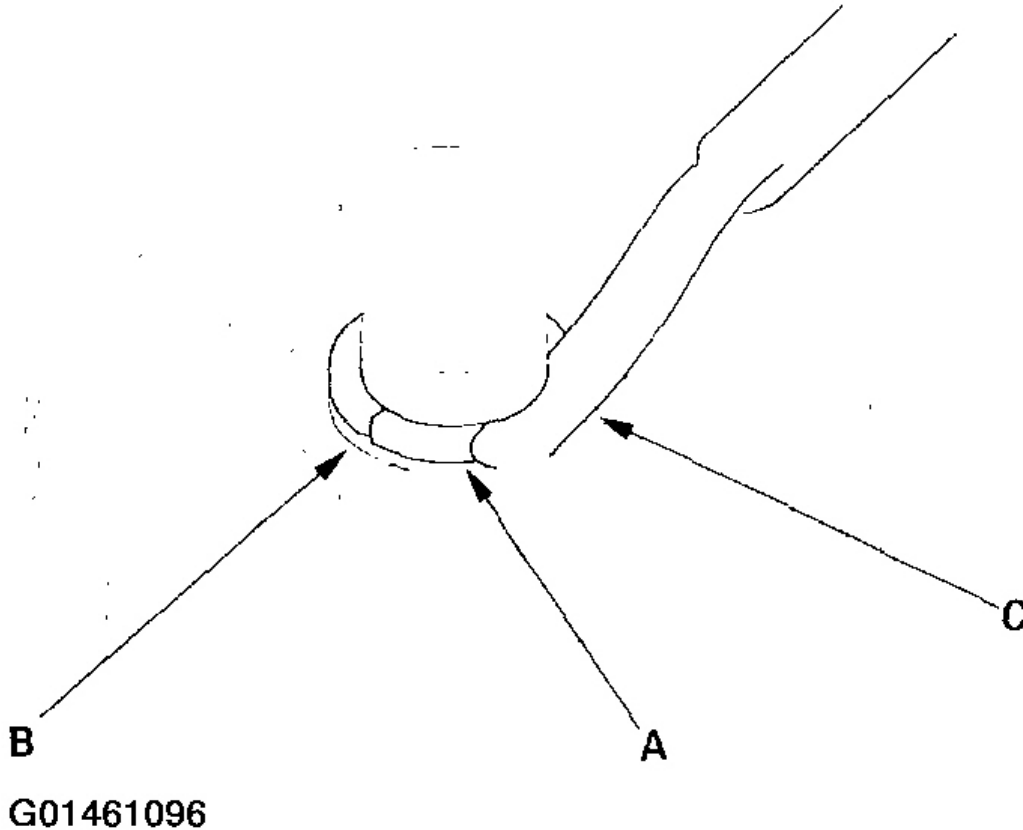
Measuring Clearance Between Cotters & Start Clutch Guide (Standard: 0-0.13 mm (0-0.005 in.))
